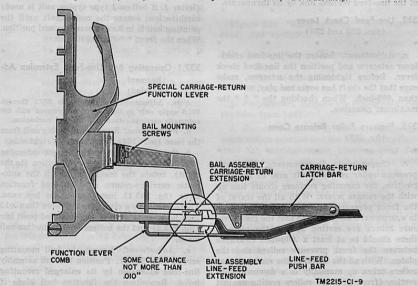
(Added) Carriage-return latch bar and bail assembly.
